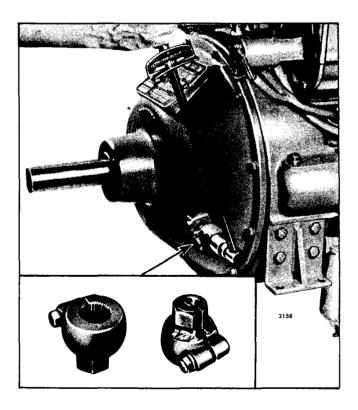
Power Take-Off Clutch Adjustment Check with Torque Wrench and Adaptor
